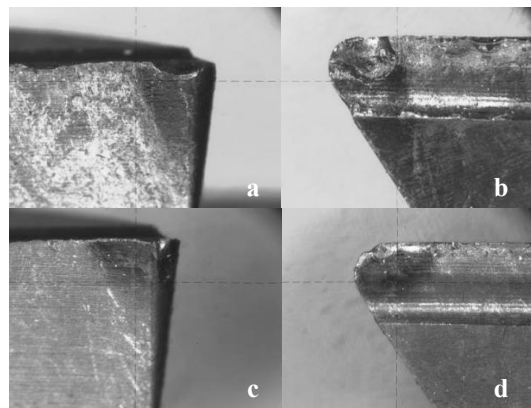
Tool wear after 15 minutes; a) flank surface-dry cutting, b) rake surface-dry cutting, c) flank surface-wet cutting, d) rake surface-wet cutting
